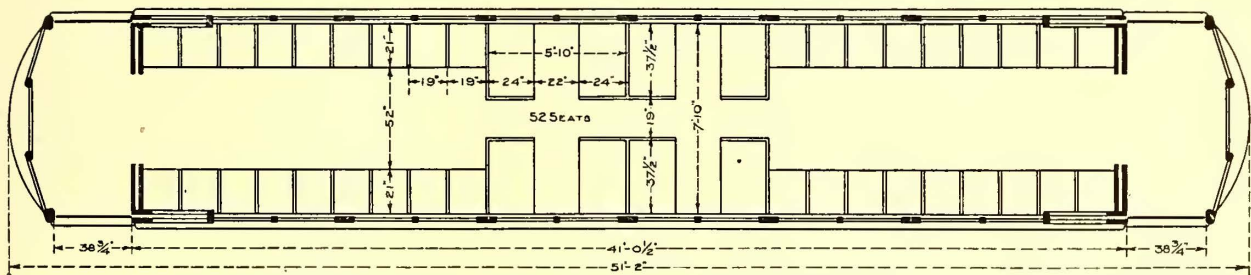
PLAN OF PRESENT SUBWAY CAR, SHOWING SEATING ARRANGEMENT AND SINGLE DOORS AT ENDS
